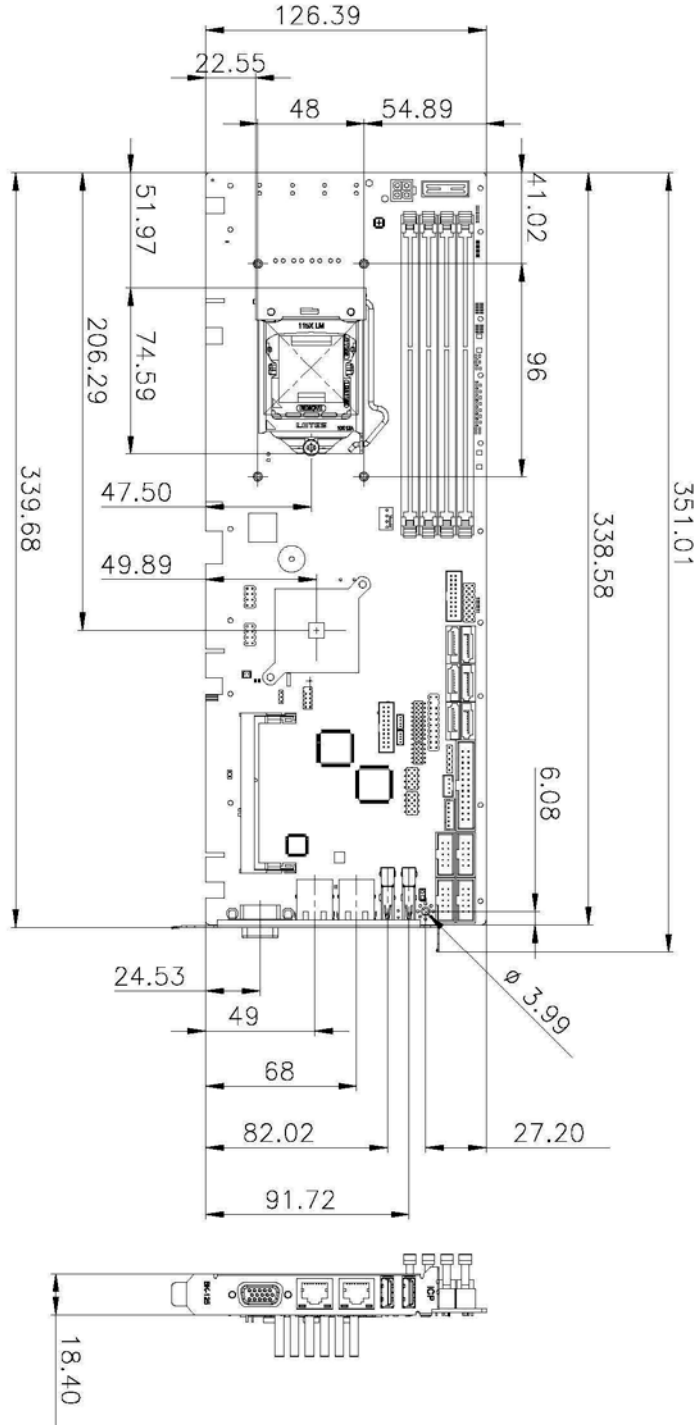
PCIE-Q870-i2 Dimensions (mm)
